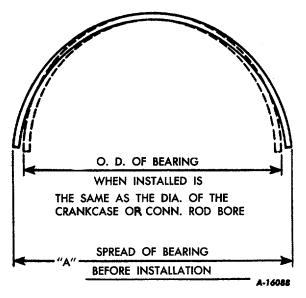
Illustrating Bearing Spread BEARING SPREAD DIMENSION (Minimum)
